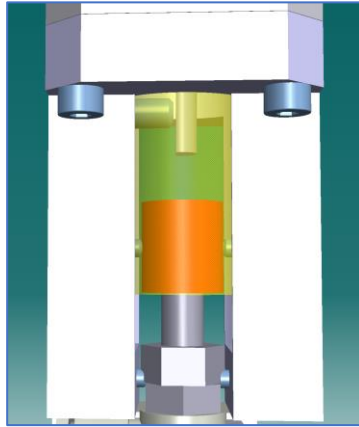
Drosel - coupling - motor assembly realised in Catia
